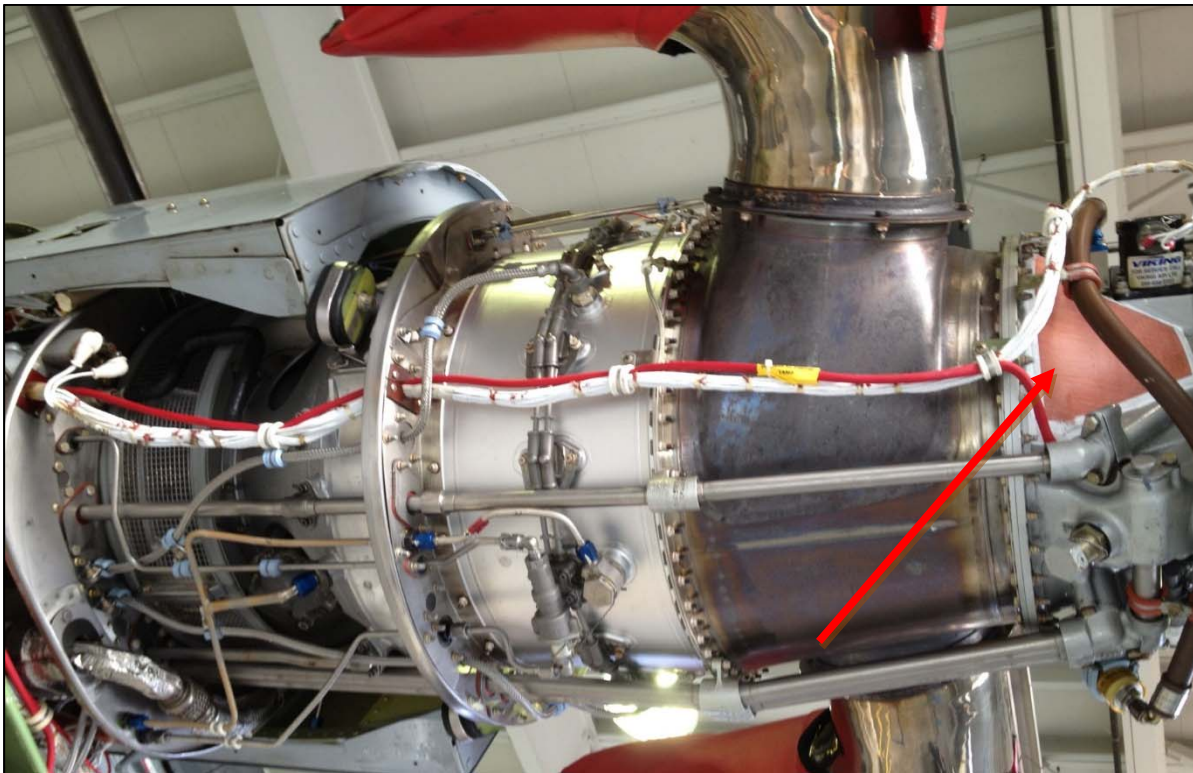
Engine PRGB. Locate TEN2659-, right side lead down with existing wiring to engine to junction.
